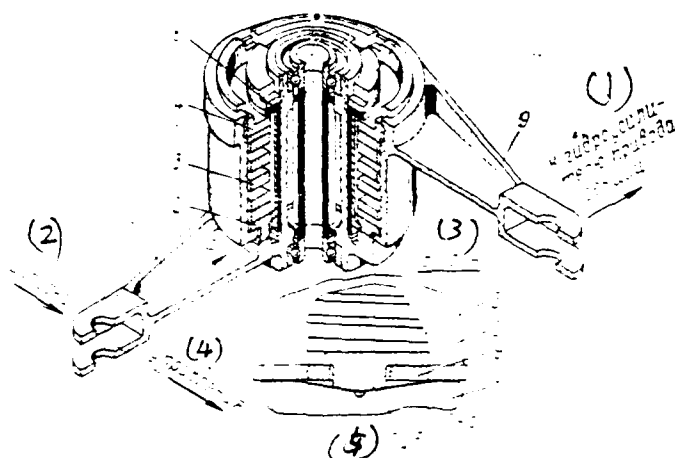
Construction/design of "untying" rocker with limiting moment clutch: 1 - intake lever with axis/axle; 2 - check ring with teeth; 3 - spring; 4 - nut of control of tightening spring; 5 - bushing of slip; 6 - ball bearing; 7 - spacer; 8 - nut; 9 - output lever with sleeve/beaker.
